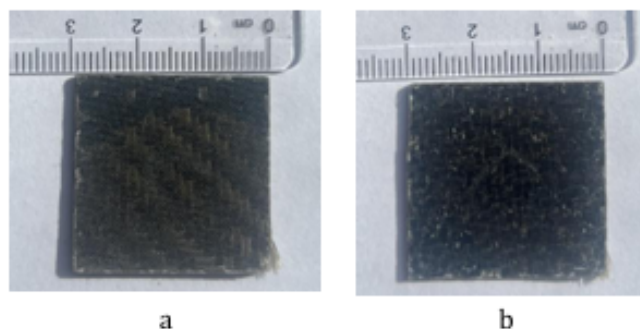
Images of BFRPC samples: a - coarse cut and b - fine cut
